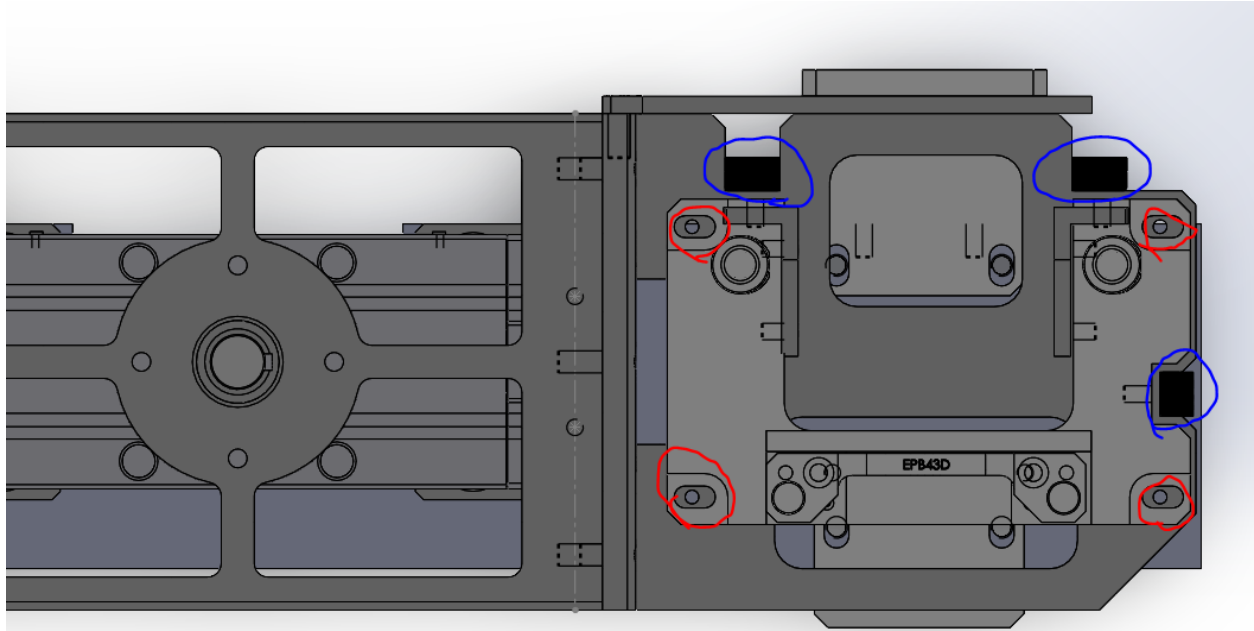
Top View Right Side, Adjustment Blocks Circled In Blue, Mounting Hole Slots Circled In Red
